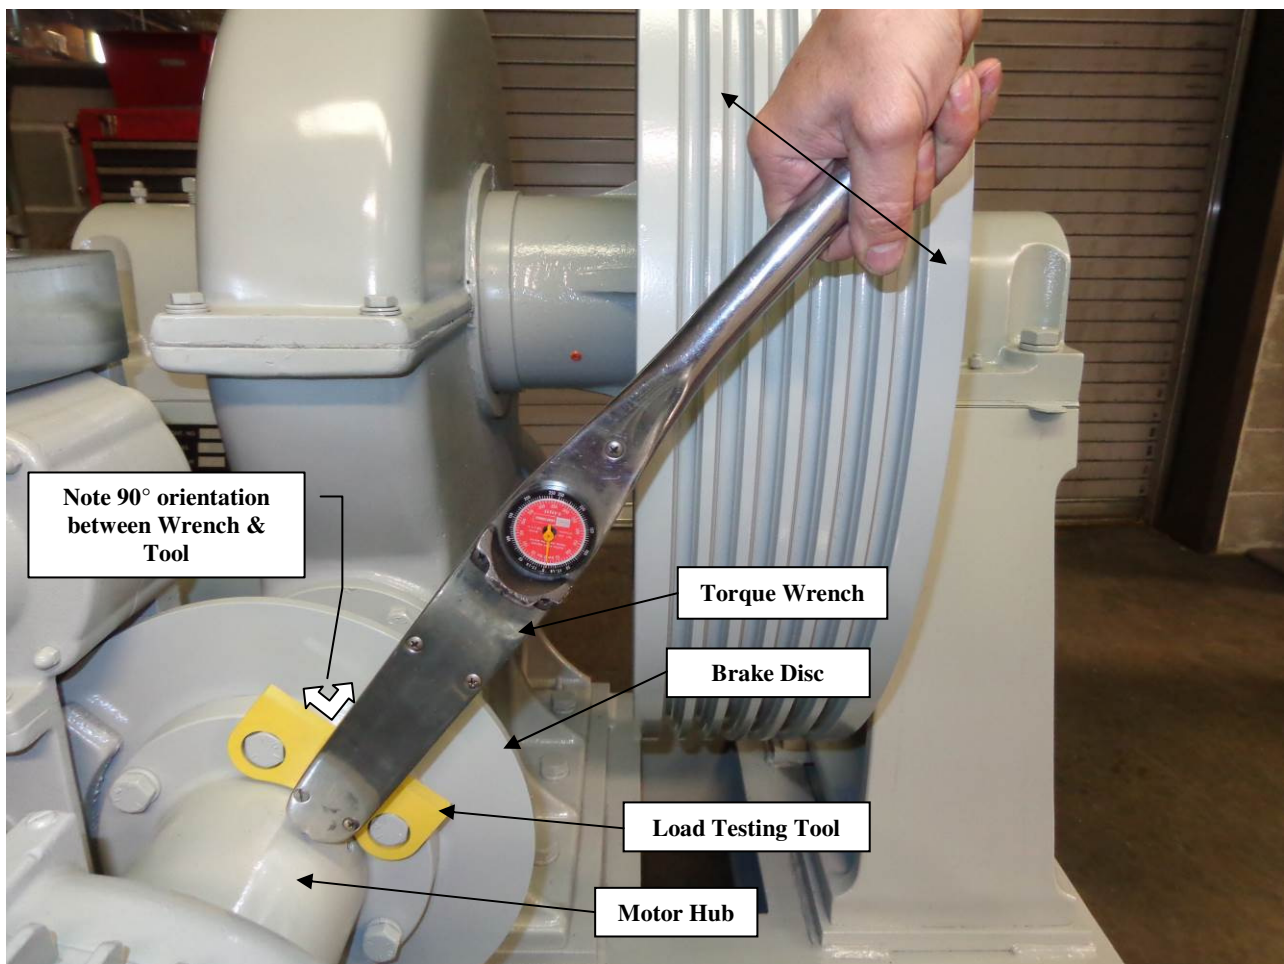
Tool Placement: Disc Brake Testing, Drum Brake Similar, See Figure 3
